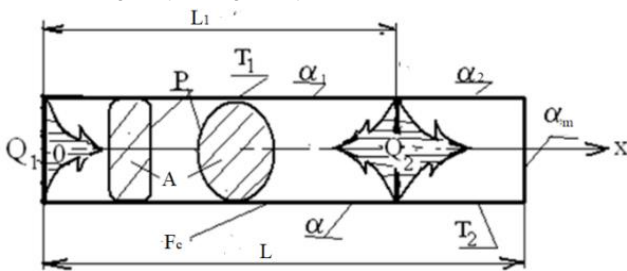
Thermal model of spindle assembly with free surface of heat exchange at front bearing.
